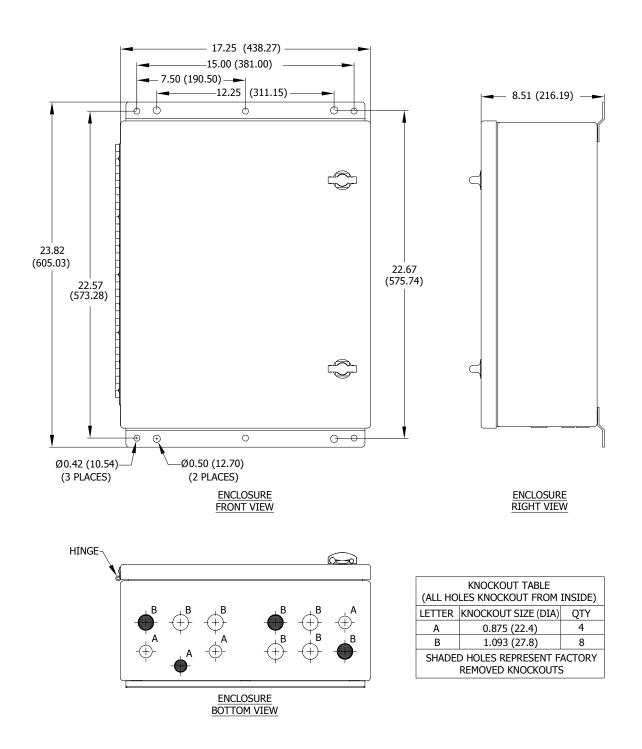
SC 370 Mounting and Outline (Painted Aluminum Option)
